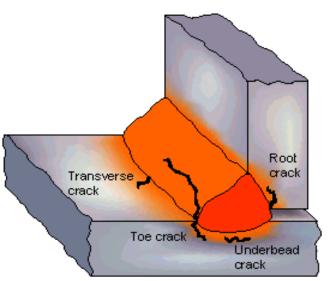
Hydrogen cracks originating in the HAZ (note, the type of cracks shown would not be expected to form in the same weldment)
